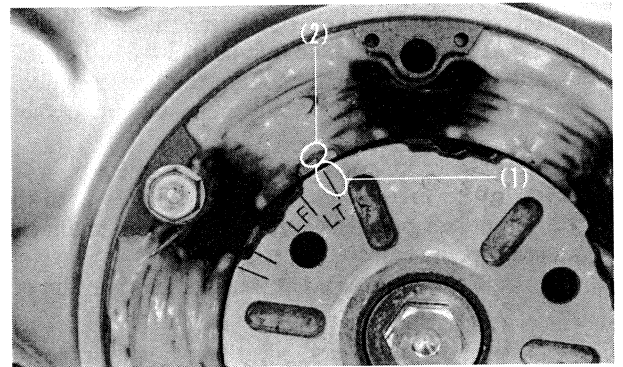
Place piston at T.D.C. position on compression stroke
